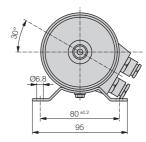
Fixing with mounting foot. (If the cable glands are in the way when mounted as above, the KINAX WT 710 should be rotated over 120°, after loosening the 3 screws holding the gear).
